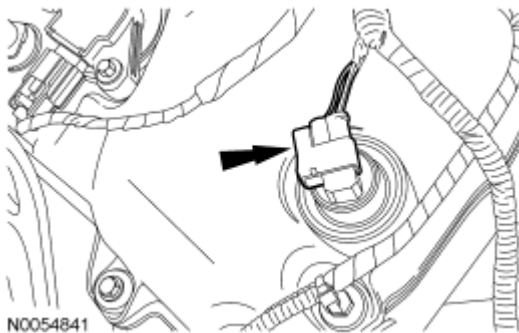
Locating RH Variable Camshaft Timing (VCT) Solenoid Electrical Connector
